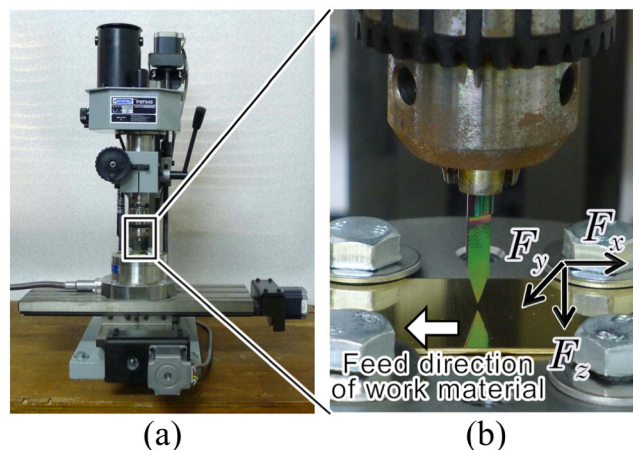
Photographs of (a) the engraving test machine and (b) the cutter mounting position.
